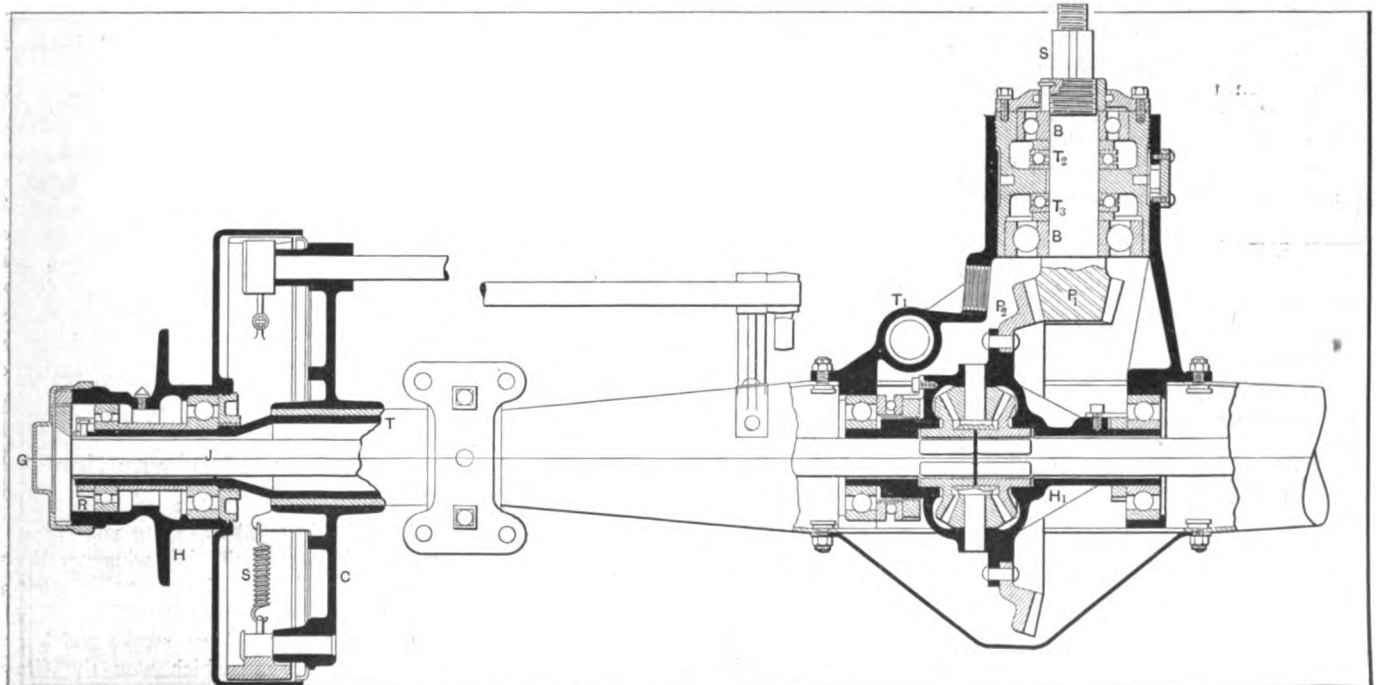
Sectional view through rear axle, showing differential, driving wheel and driving shaft ball-bearing supports
